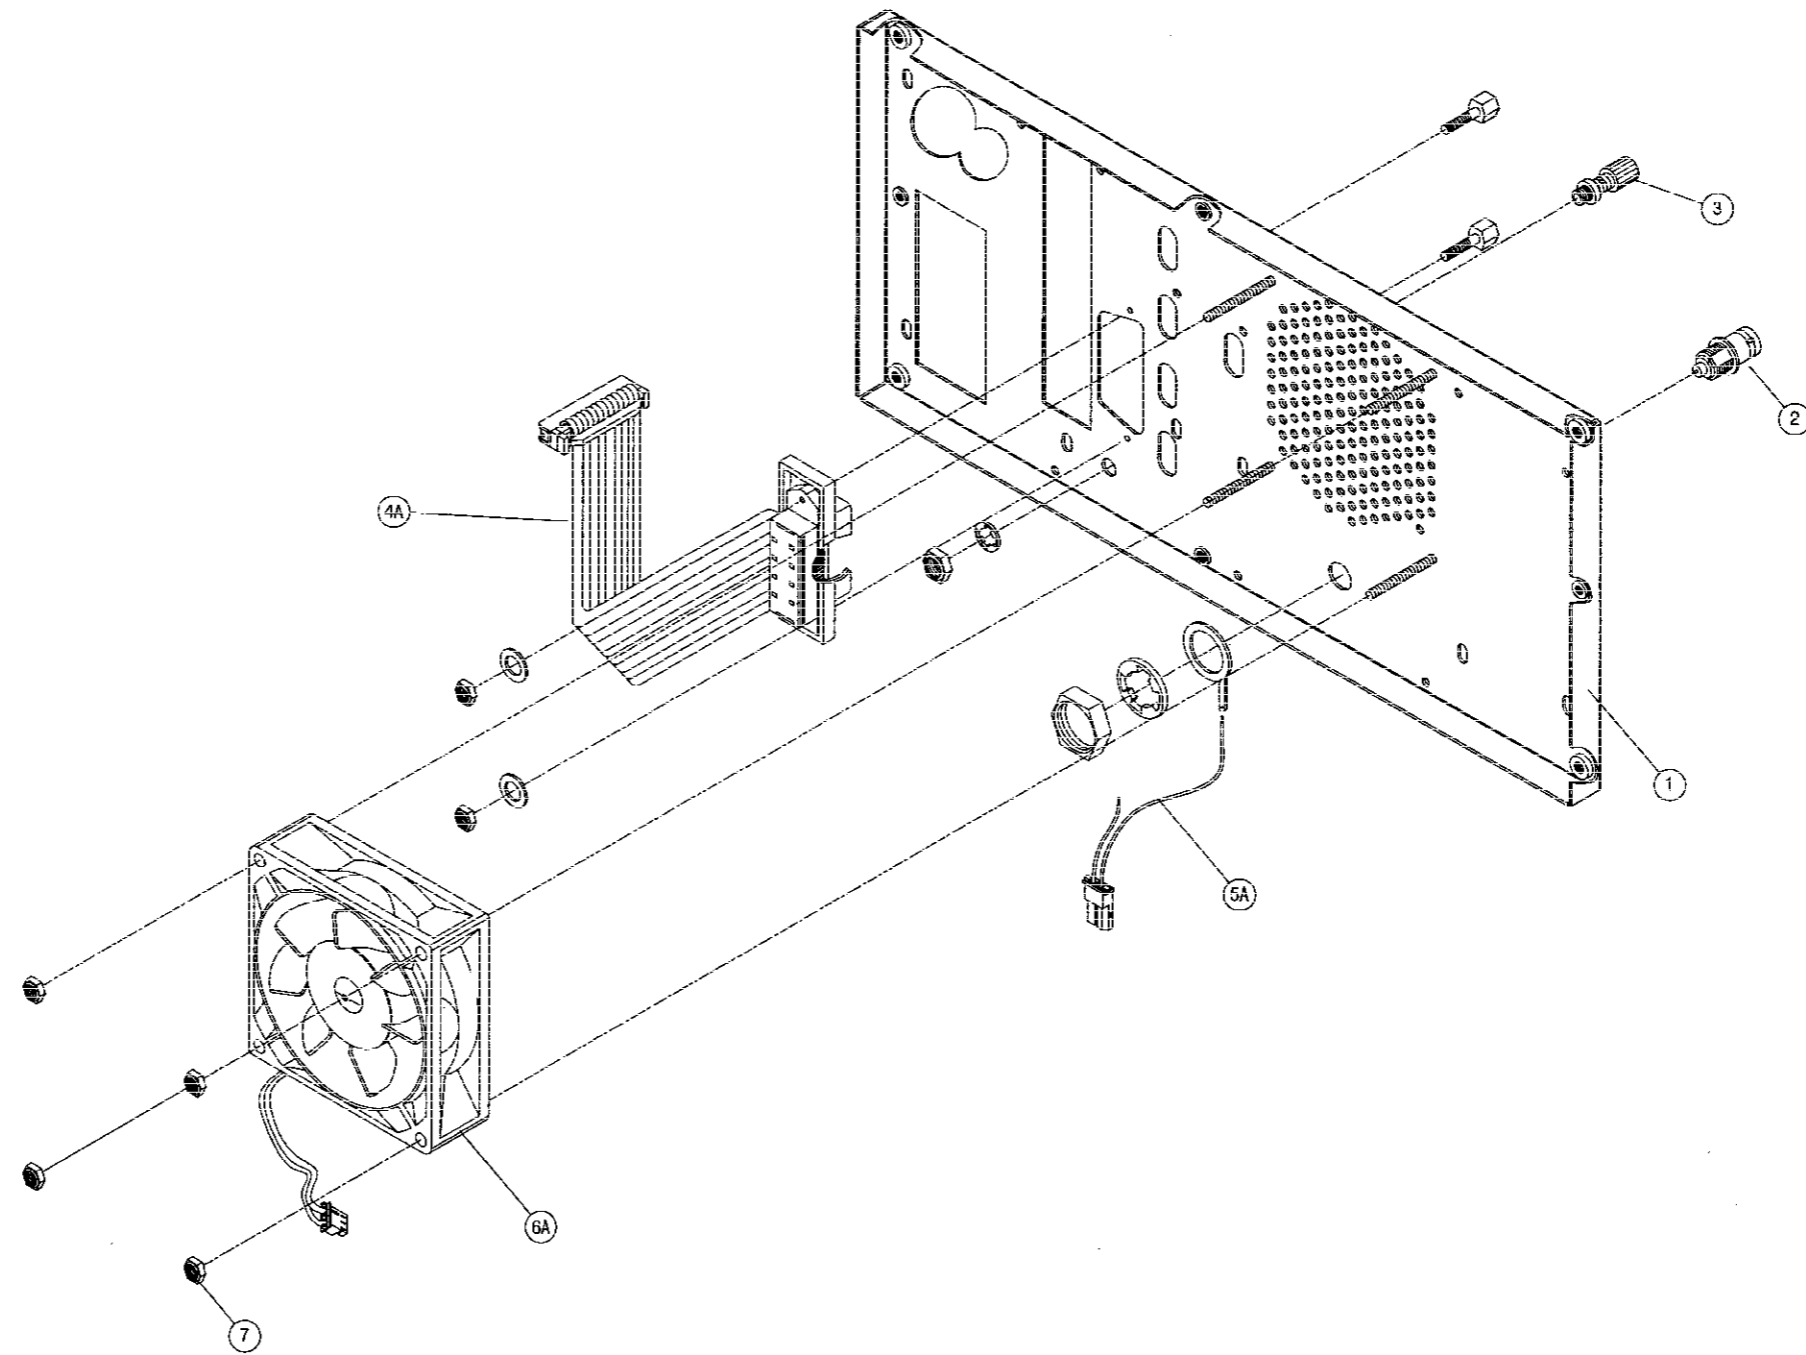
REAR FRAME ASSEMBLY 7-17
